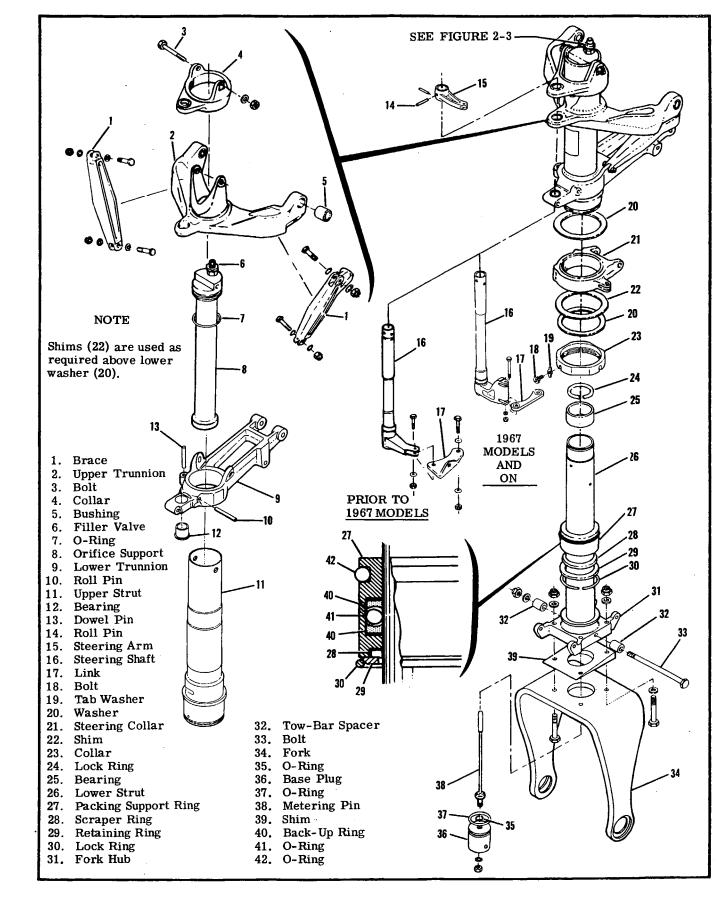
Heavy-Duty Nose Gear Shock Strut
